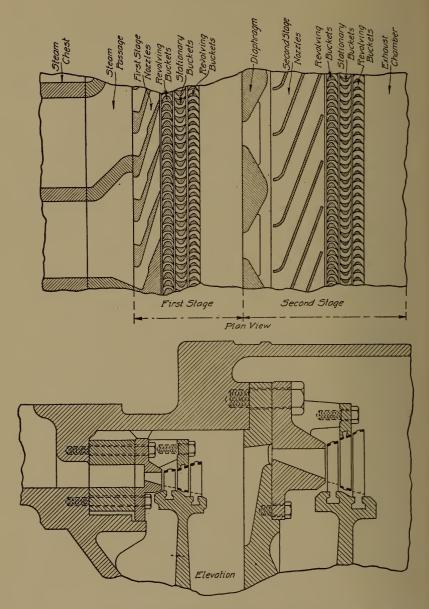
Plan and Elevation Showing Steam Passages in Curtis Two-Stage Steam Turbine
